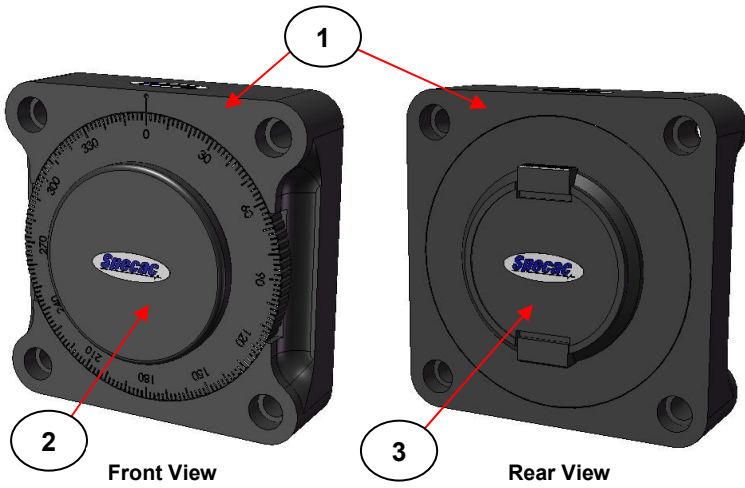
Front and Rear Views of Rotator Mount P/N GS57340
